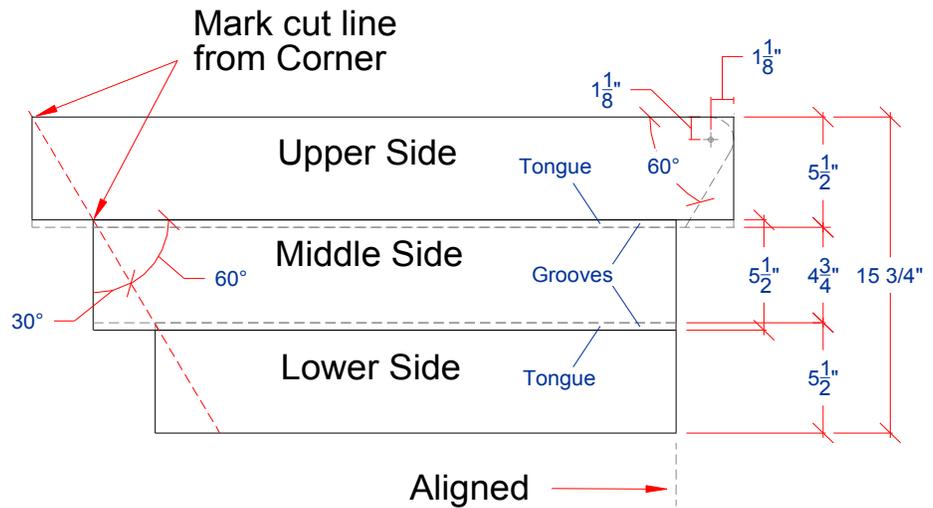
Cutting layout for cart side boards. Label boards left and right so you can reassemble them for the best fit.
